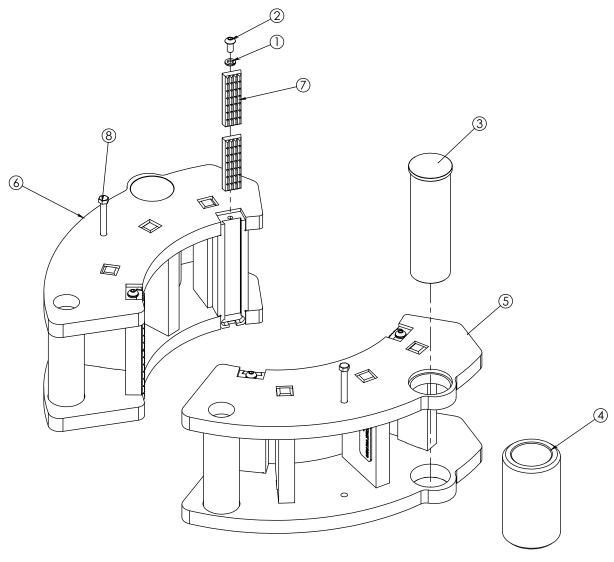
Typical Standard Jaw Die Kit (16-1/2" Shown)
